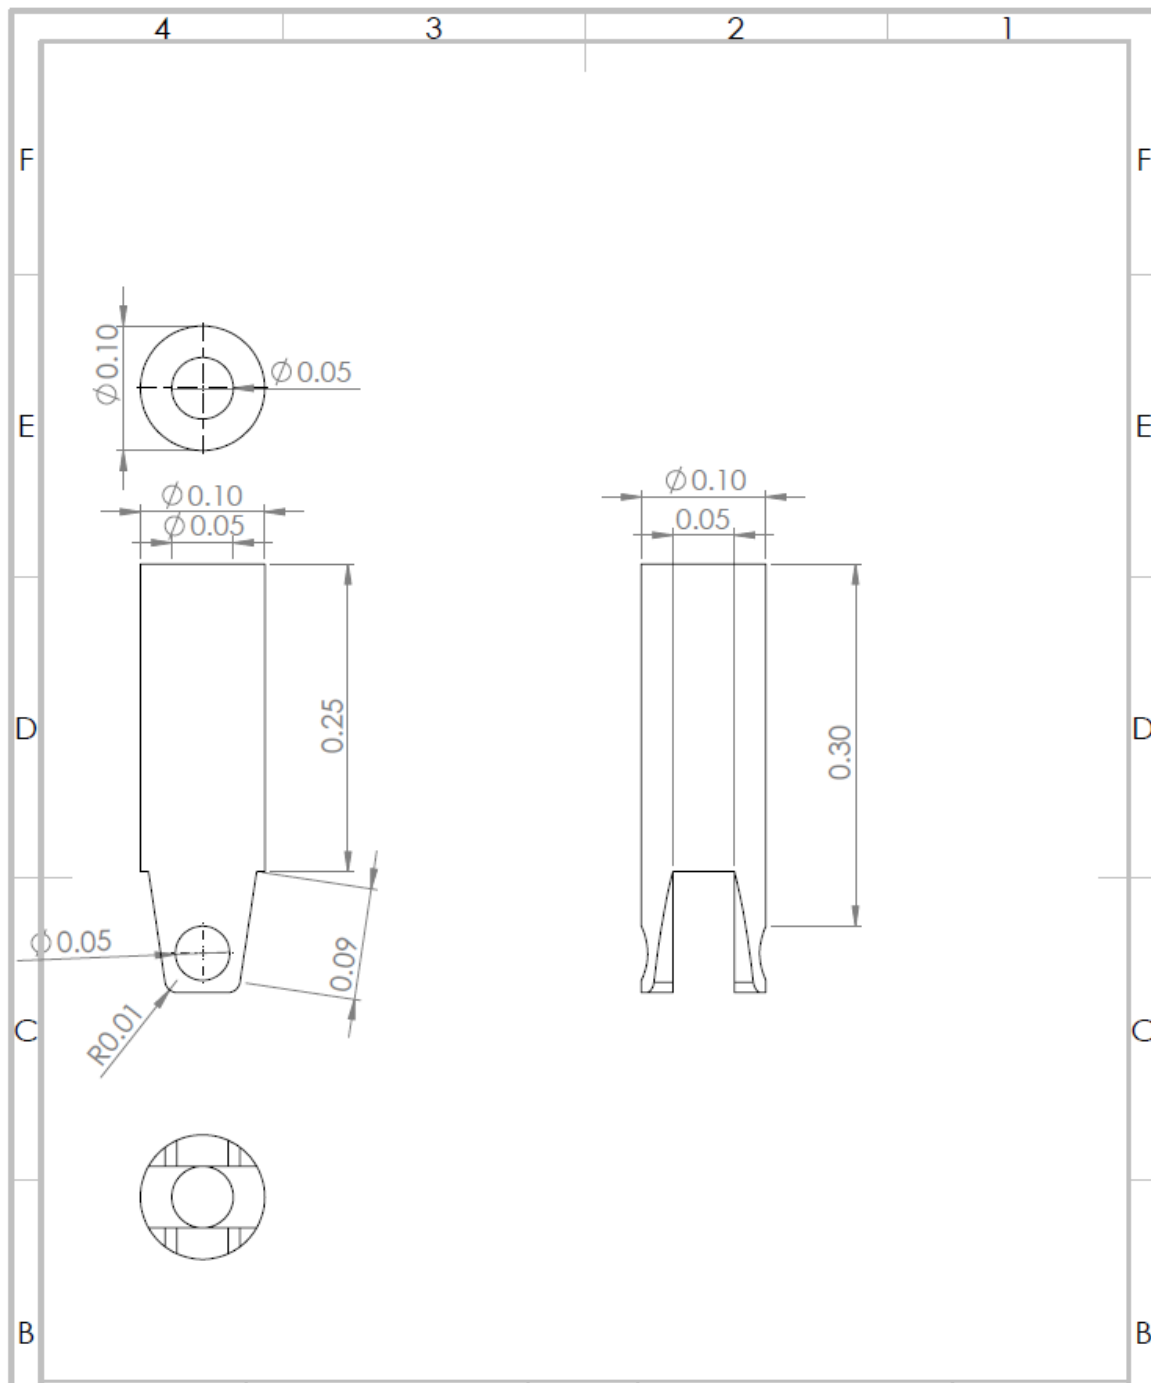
Dimension of Universal Joint (Lower Yoke)
